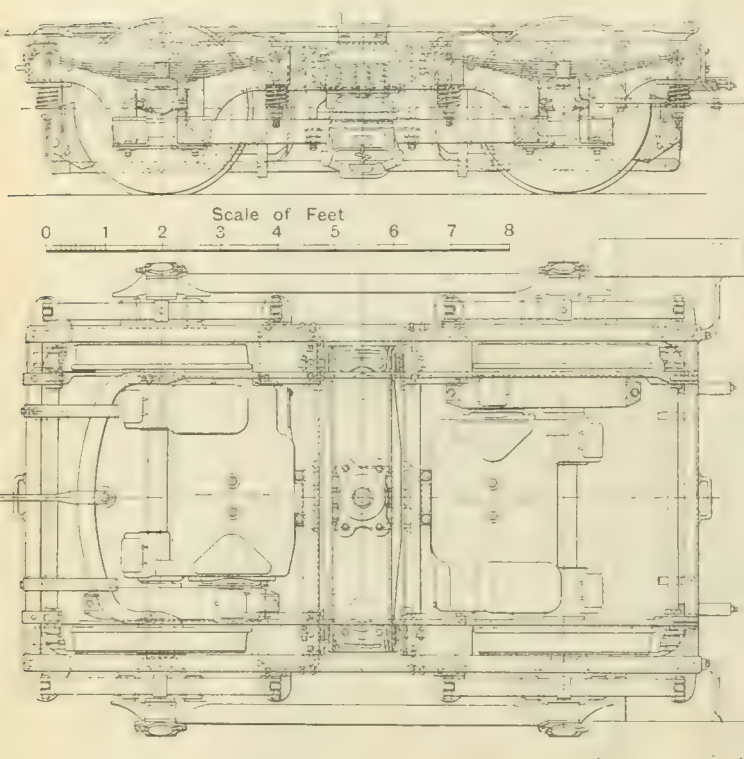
PRESSED STEEL MOTOR TRUCK OF THE BRUSH COMPANY.
